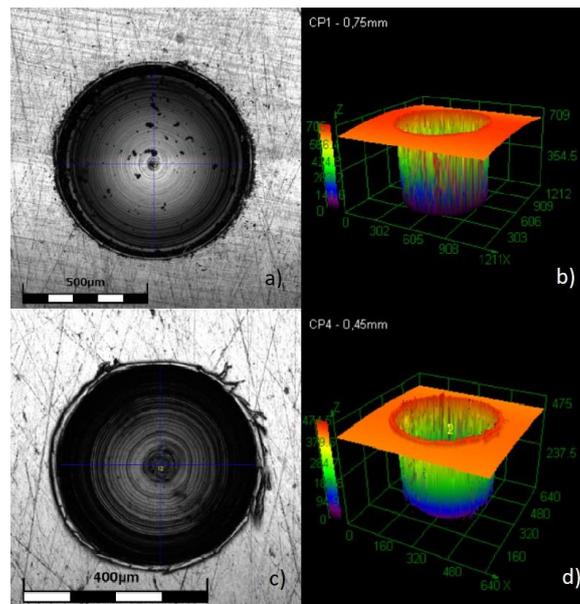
a) View of the finished hole $\varnothing = 0.75$ mm and $h = 0.65$ mm and b)3D image of $\varnothing = 0.75$ mm. c) View of the finished hole $\varnothing = 0.45$ mm and $h = 0.42$ mm and d)3D image of $\varnothing = 0.45$ mm
